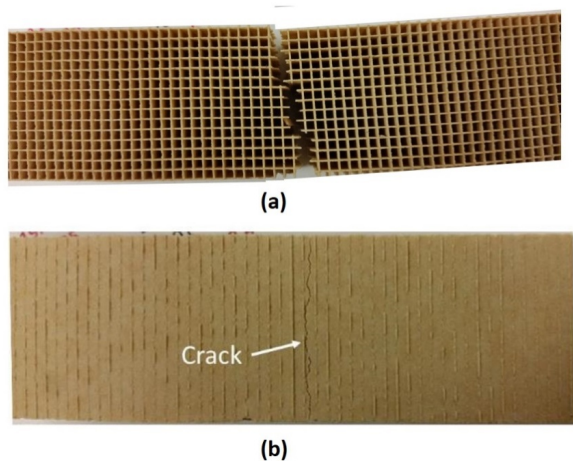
(a) Fractured specimen after 3-point flexural loading and (b) crack at the point of maximum deflection in an axially loaded test specimen.
